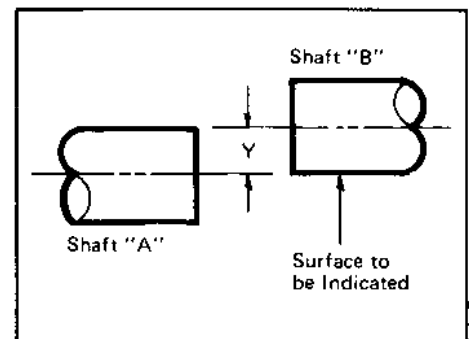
To measure offsets with a dial indicator, attach the indicator to shaft "A," rotate shaft, and indicate to the periphery of shaft "B." To obtain actual displacements of shafts, divide dial indicator readings by 2.
